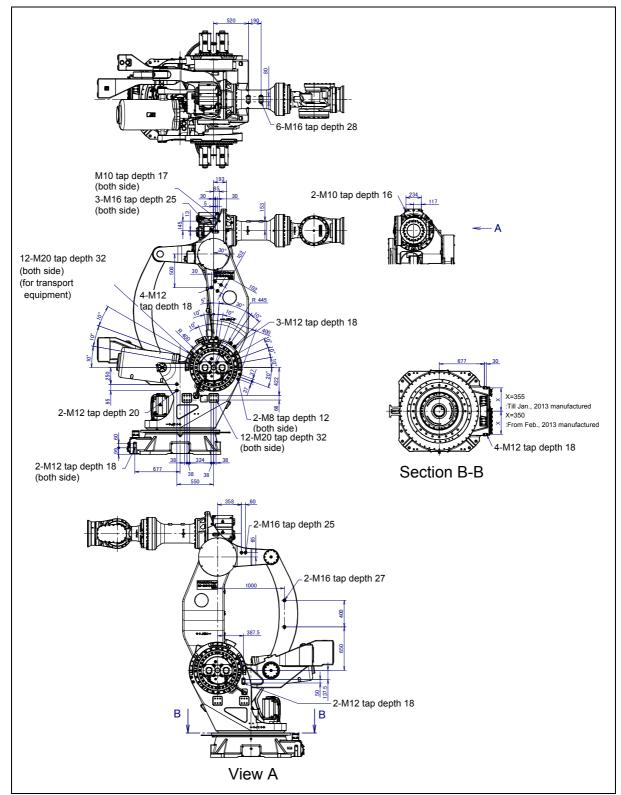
(a) Equipment mounting faces (M-2000iA/1200)
